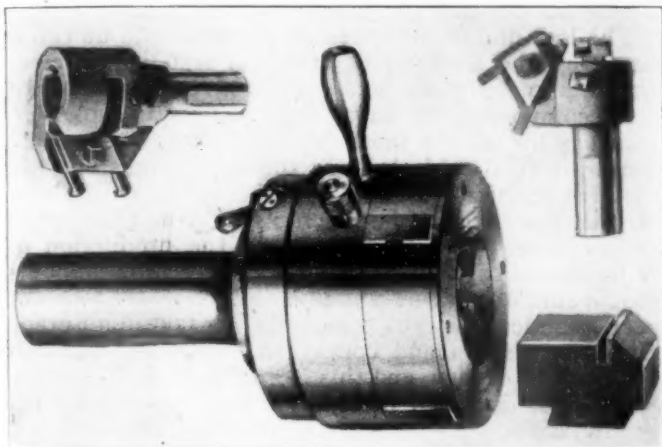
TOOL EQUIPMENT FOR MACHINING PLUGS.
